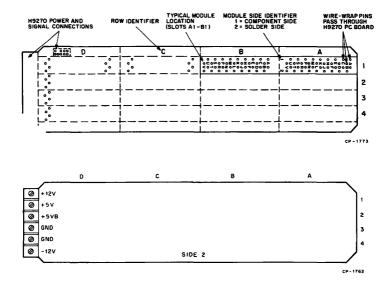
H9270 Backplane Terminal Block (Pin Side View Shown)
